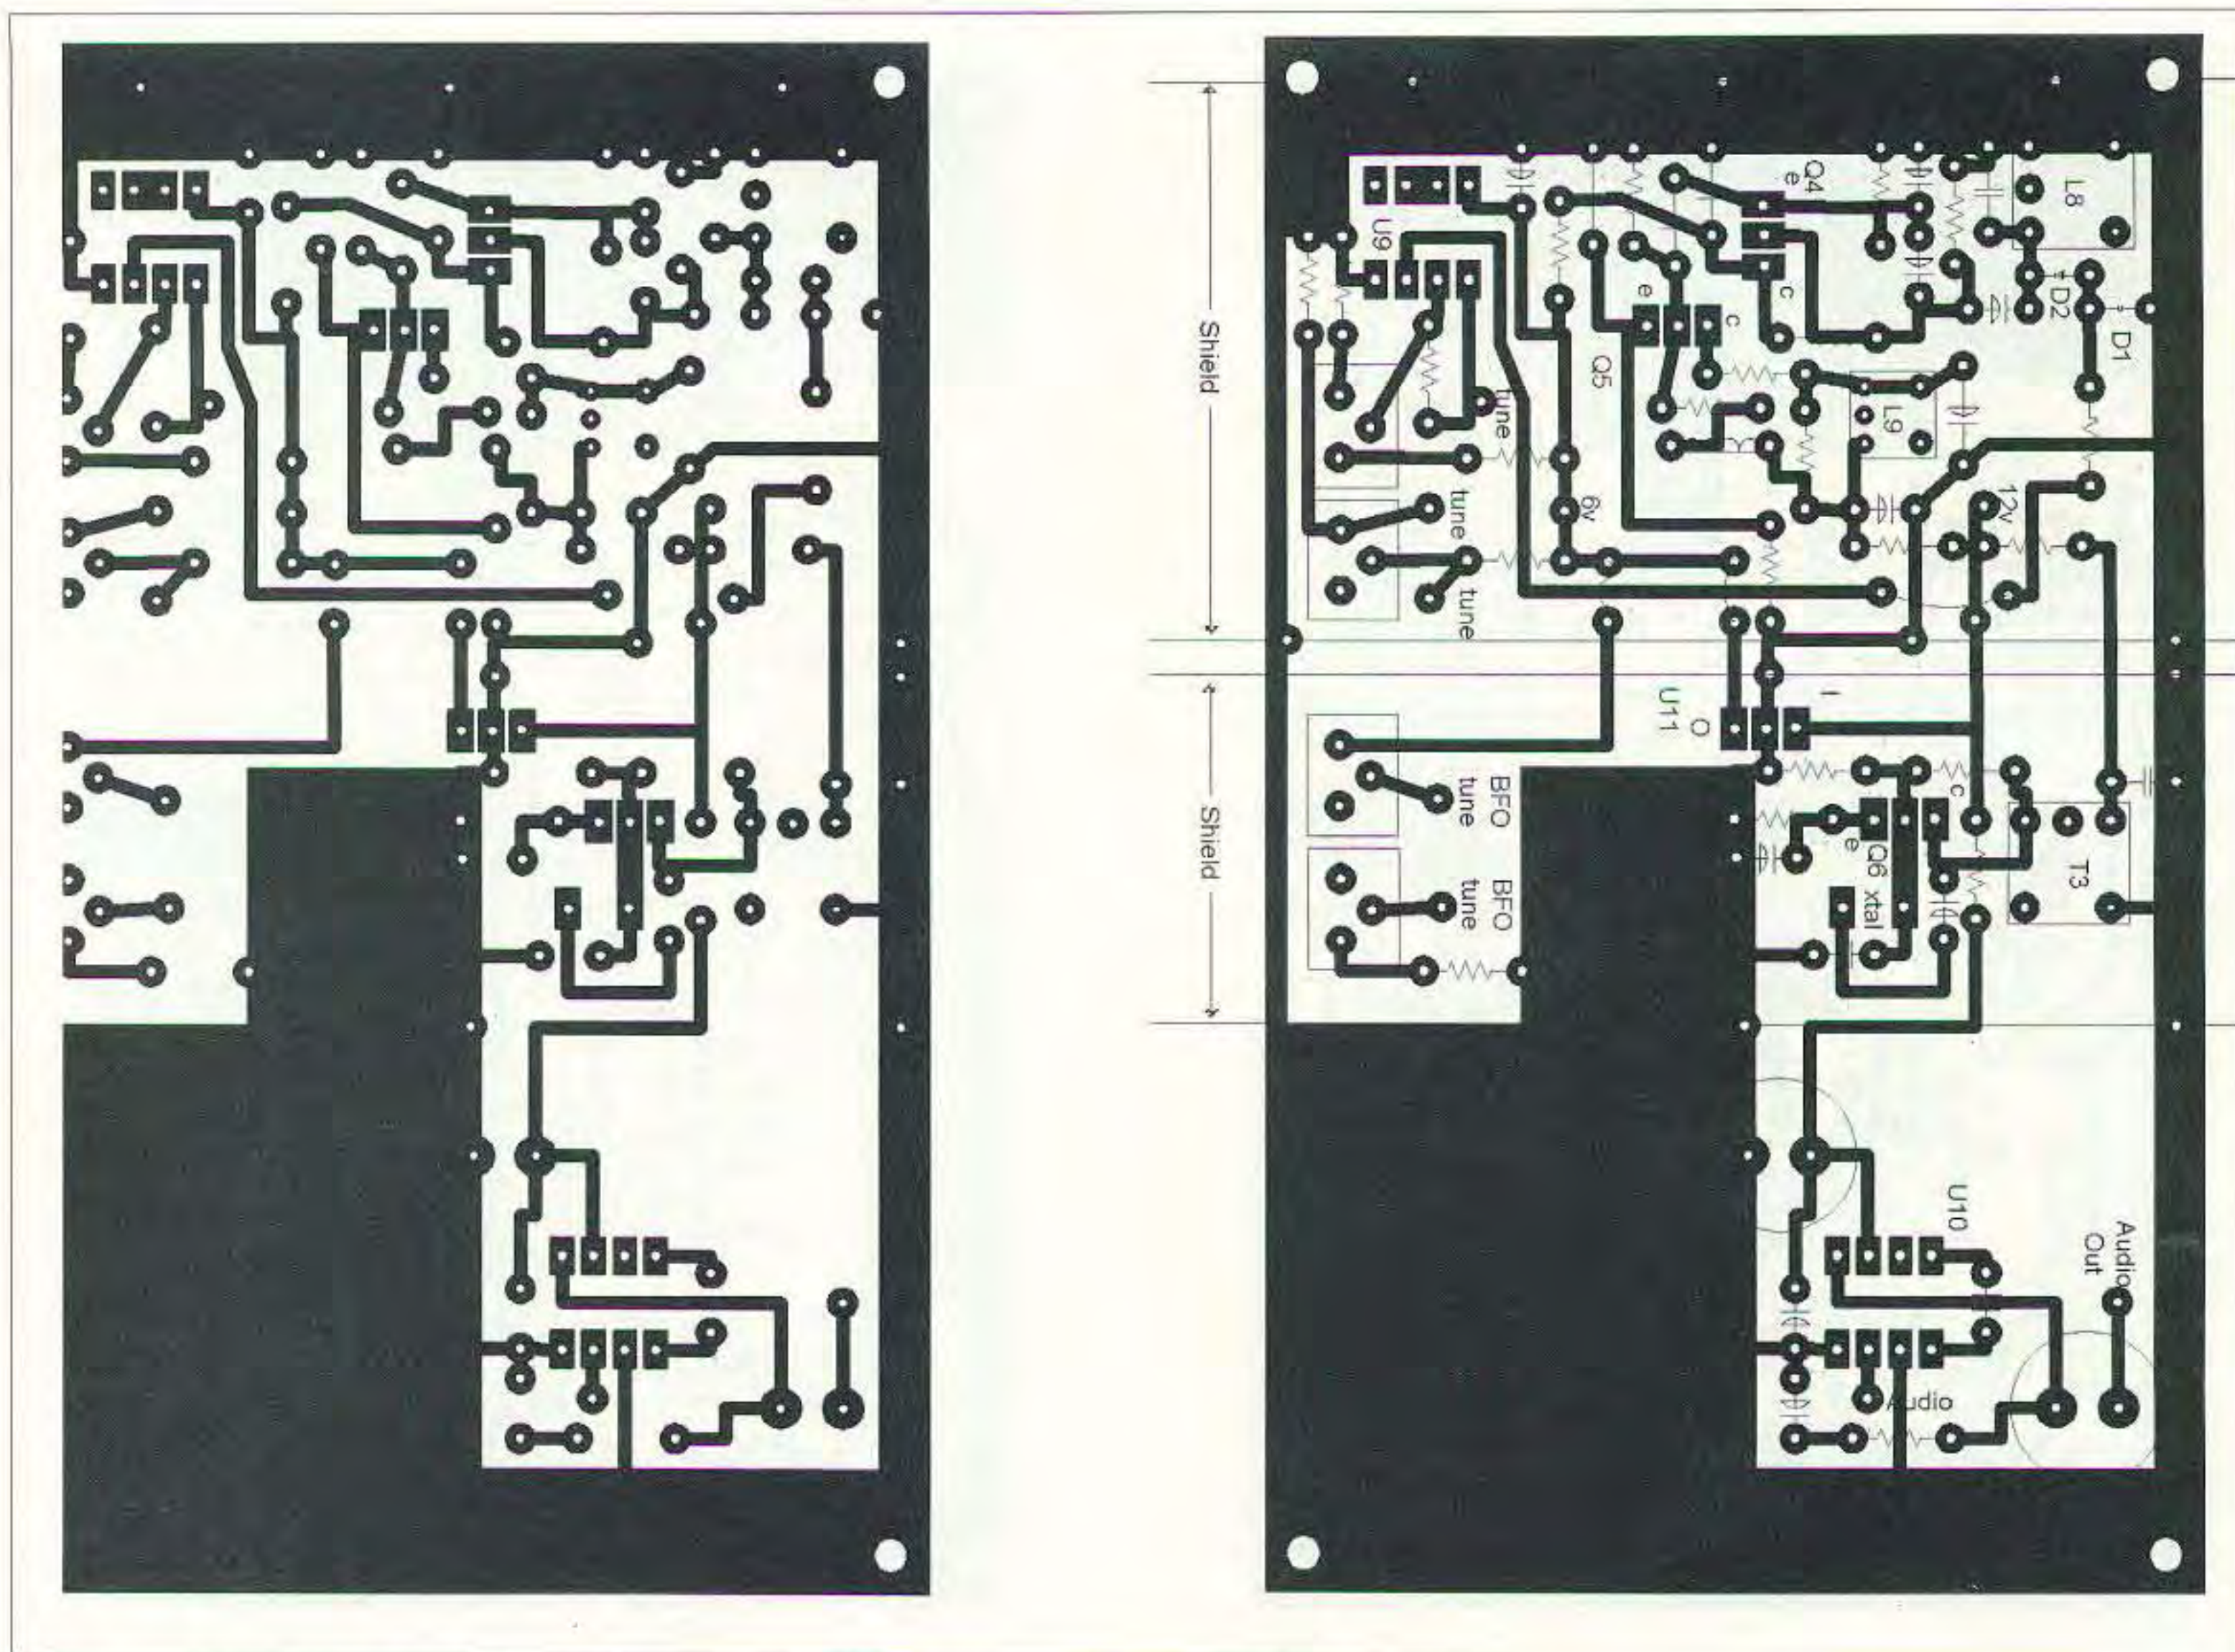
(a) Oscillator board. (b) Parts layout from foil side.
